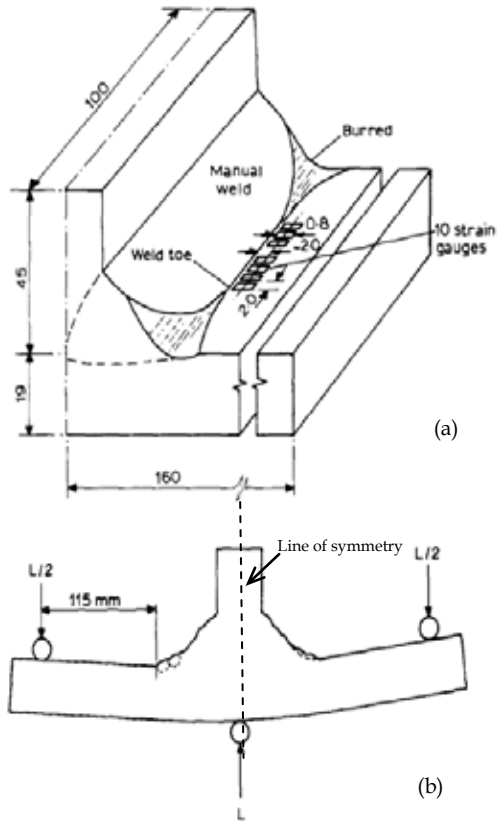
Fatigue testing by Otegui et al. [1] (a) Geometry of the specimen (b) Experimental set-up (dimensions are in millimetres)
